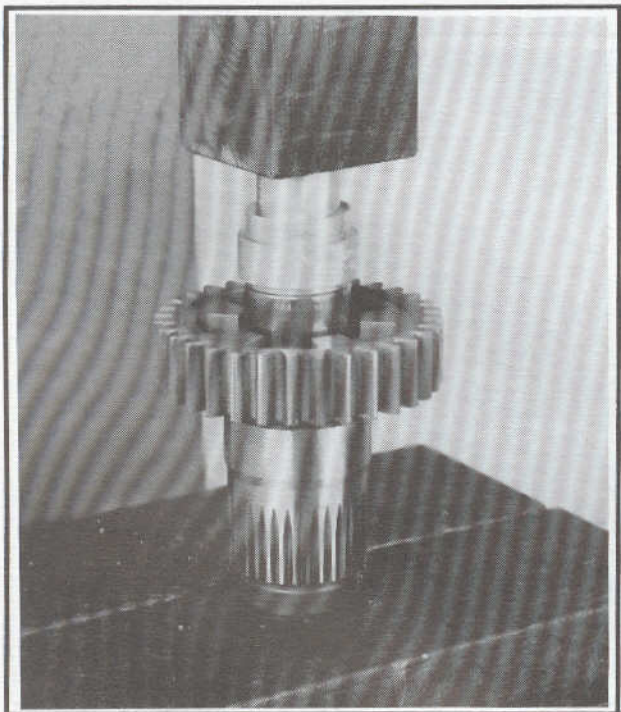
Install Transmission Side Needle Bearing in Main Drive Gear
